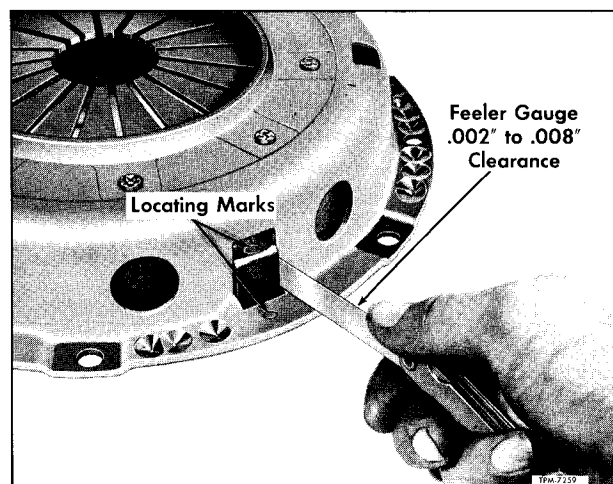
Clutch Cover To Plate Alignment Marks and Driving Lug Clearance Check
